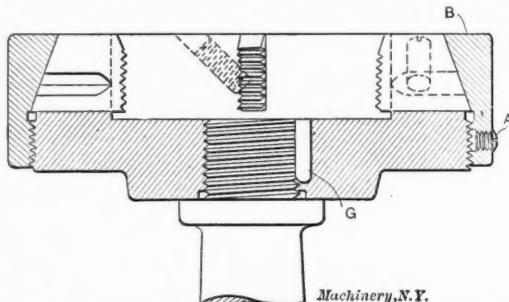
Another Type of Inserted Chaser Die with Removable Blades.
